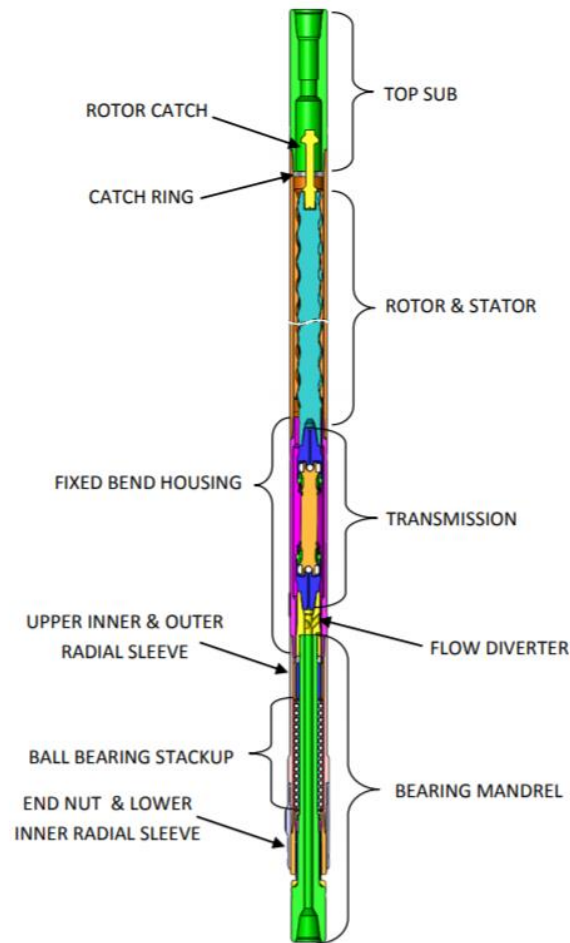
Mud motor assembly (reprinted from Weimar, 2011)
